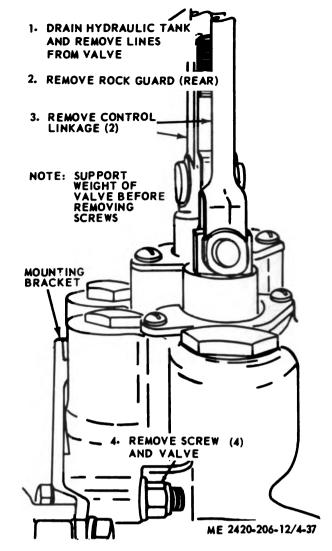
Bulldozer hydraulic valve, removal and installation.
